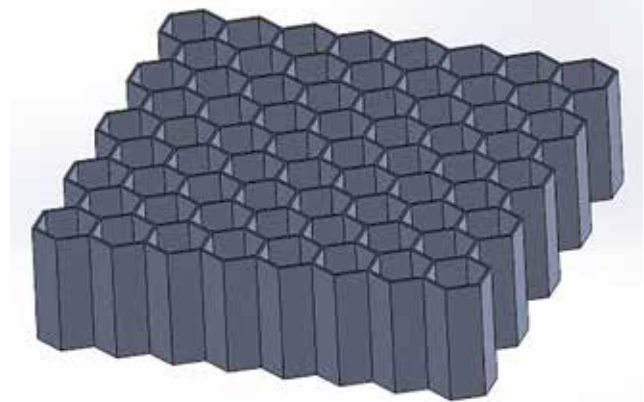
3D CAD drawing of a honeycomb structure. Courtesy of Kevin Lawson, 2019.
